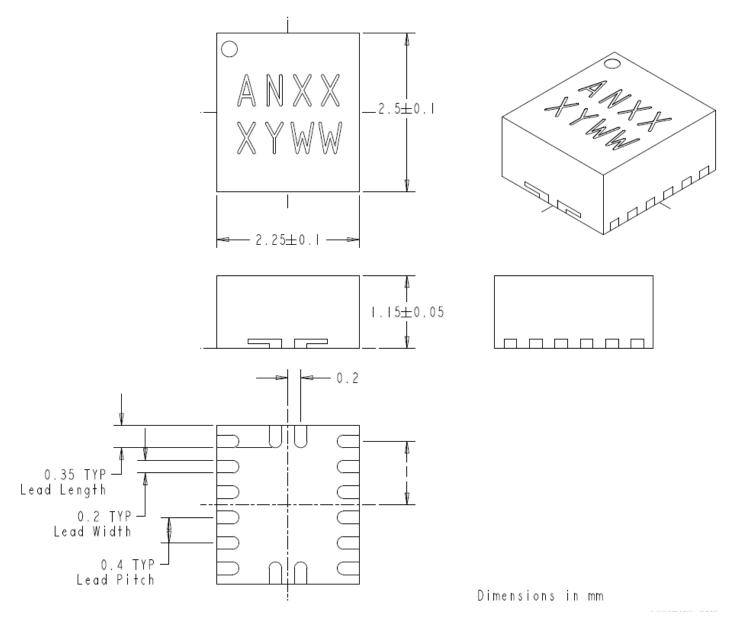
EP5358HUI Package Dimensions (Bottom View)
